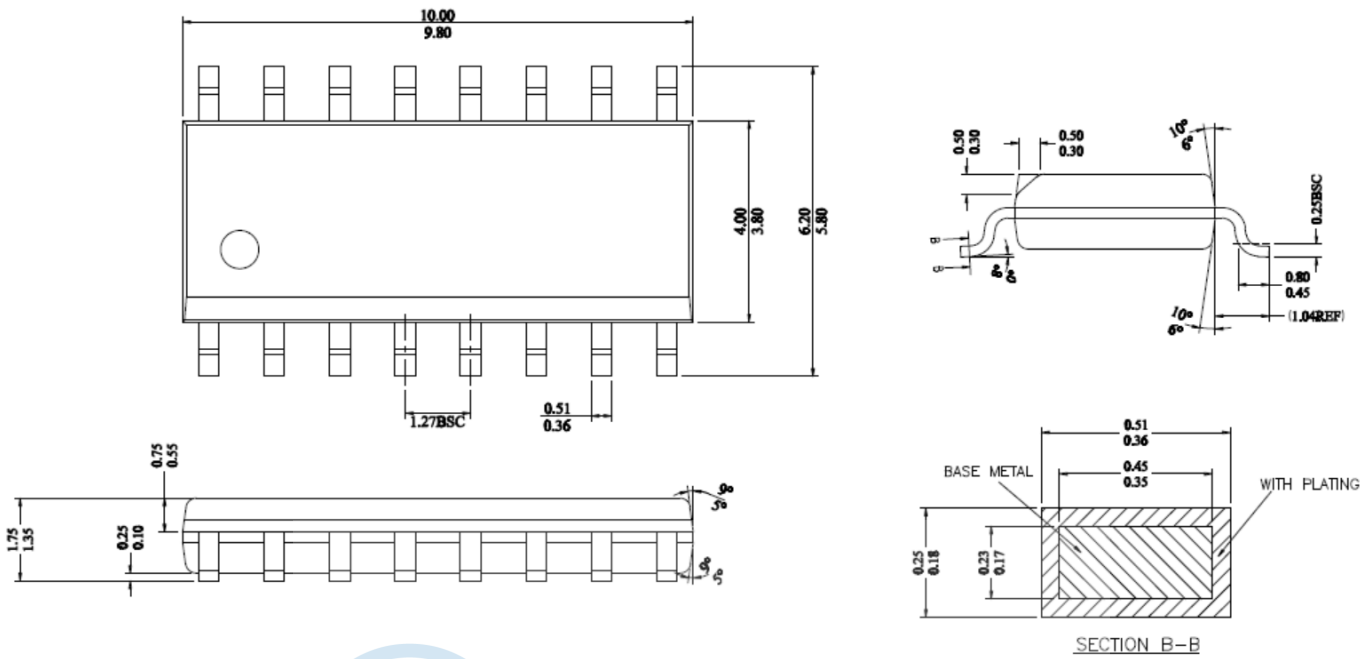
Lead Narrow body SOIC Package [NB SOIC-16] –dimension unit(mm)
